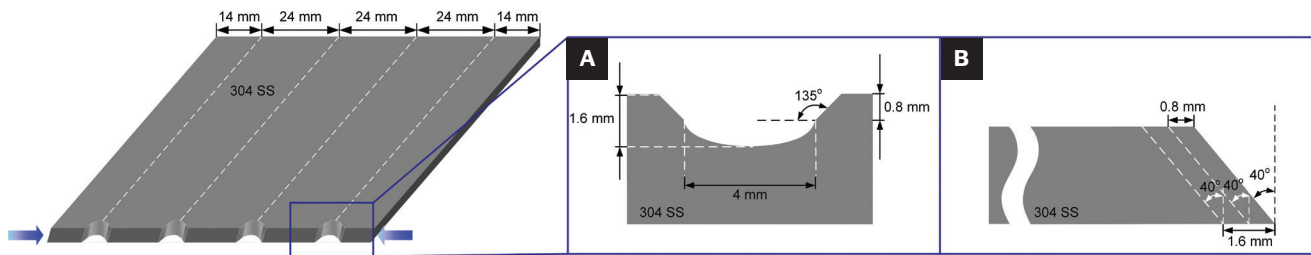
Position and dimension of flared groove design on the stainless steel side of butt joints: A – Top view; B – side view.
